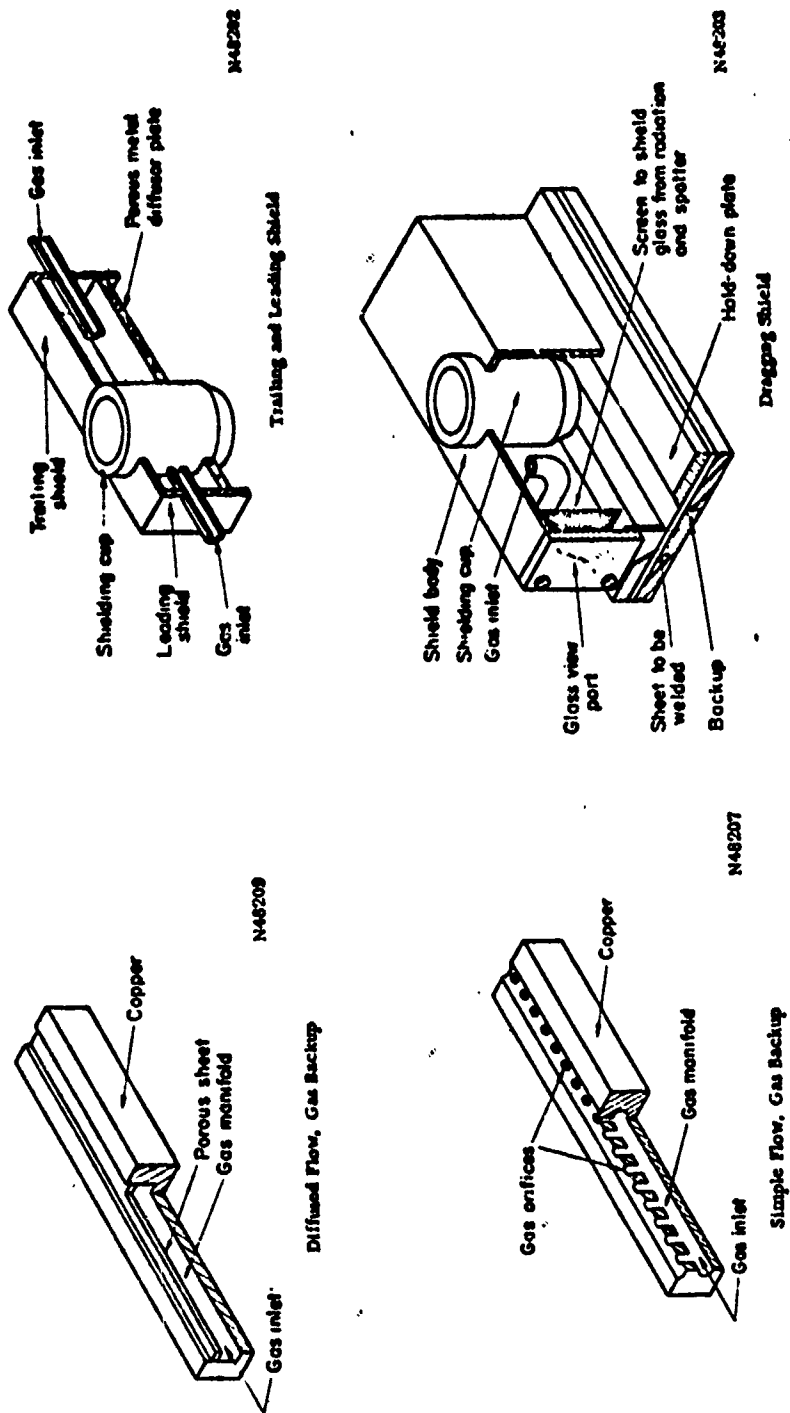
TYPES OF SHIELDS AND GAS BACKUPS USED FOR WELDING MOLYBDENUM IN AIR
